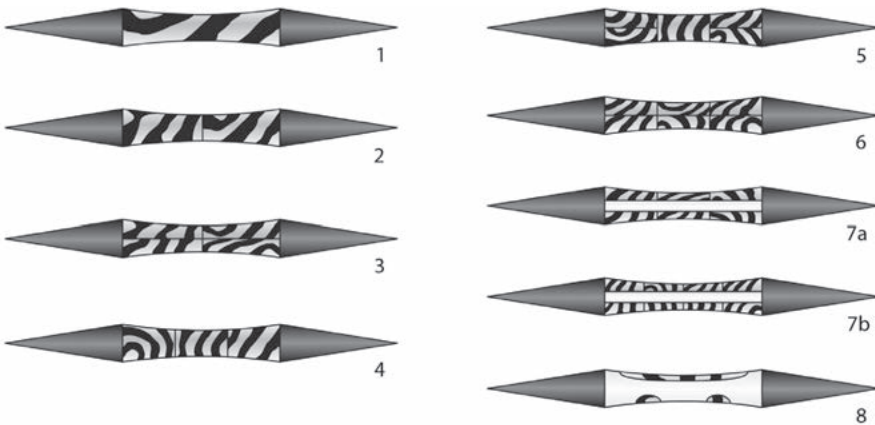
Pattern-welded blade construction types (cross-sectional view). Drawing by P. Kucypera.
